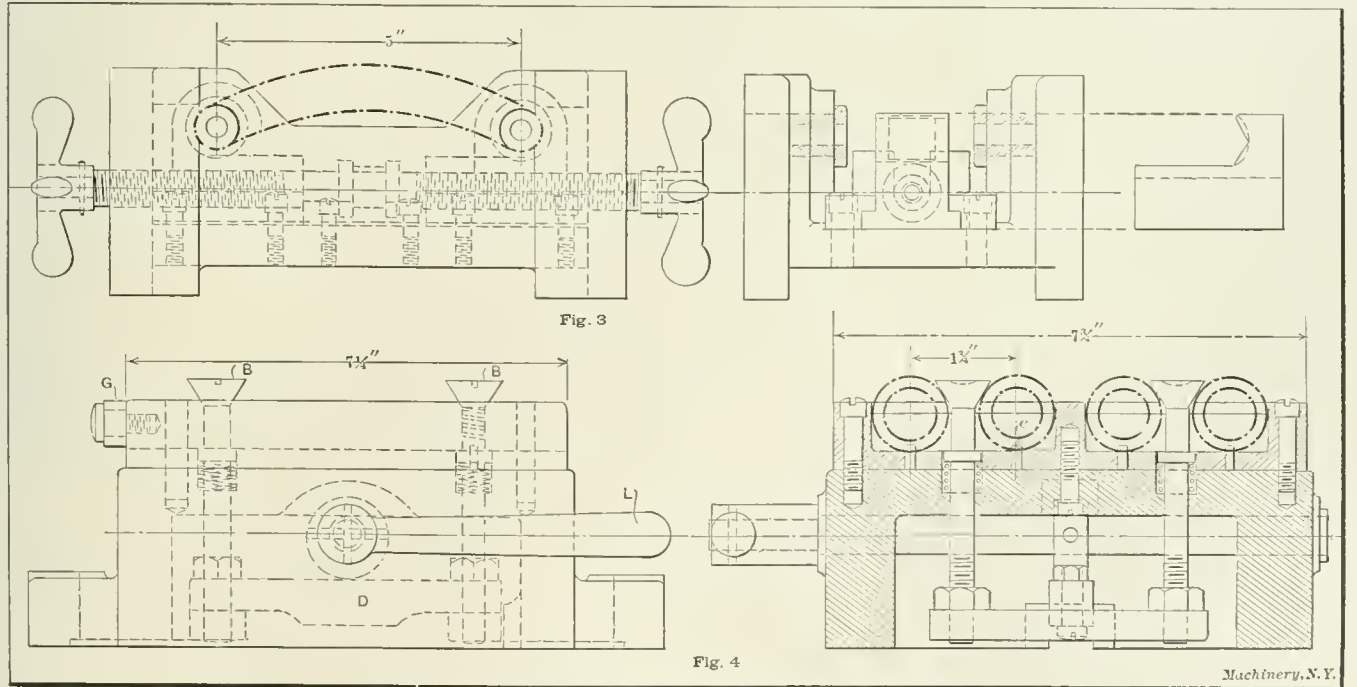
Drill Jig for Control Lever Sectors. Fig. 4. Gang Milling Fixture
